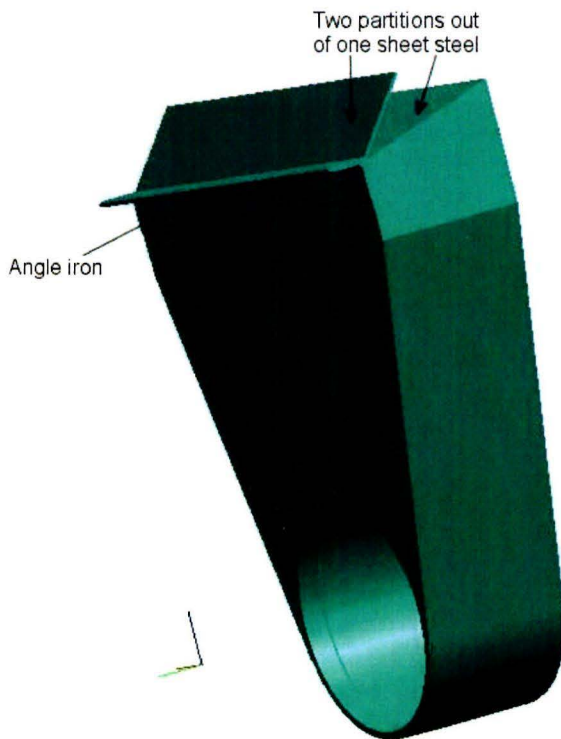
Wheel carrying arm: steel tube with two pieces sheet steel, angle iron and two partitions
